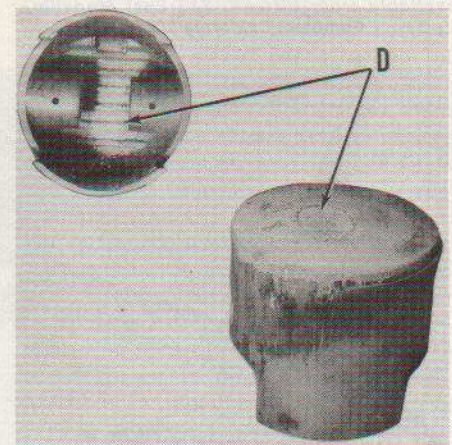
Top and bottom view of piston severely damaged by detonation. Spot (D) on top and bottom of crown show where metal has started to melt. Absence of scoring on skirt rule out seizure, overheating or lack of lubrication as a contributing cause.
